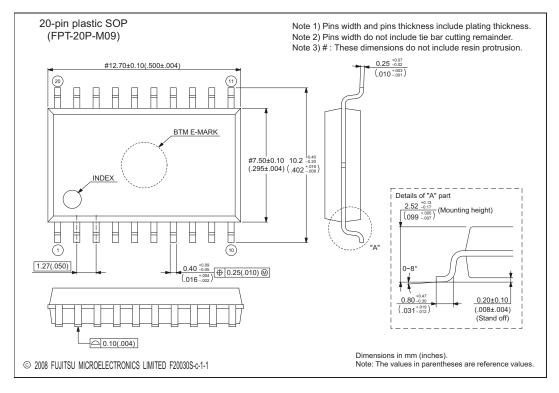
Package Dimensions of FPT-20P-M09
